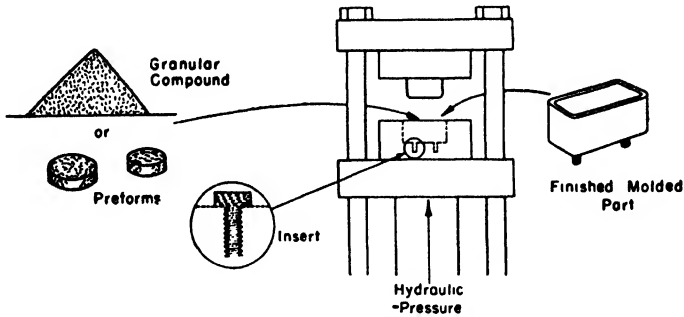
Schematic sketch showing the steps in the hot compression molding of a small part containing two inserts.
